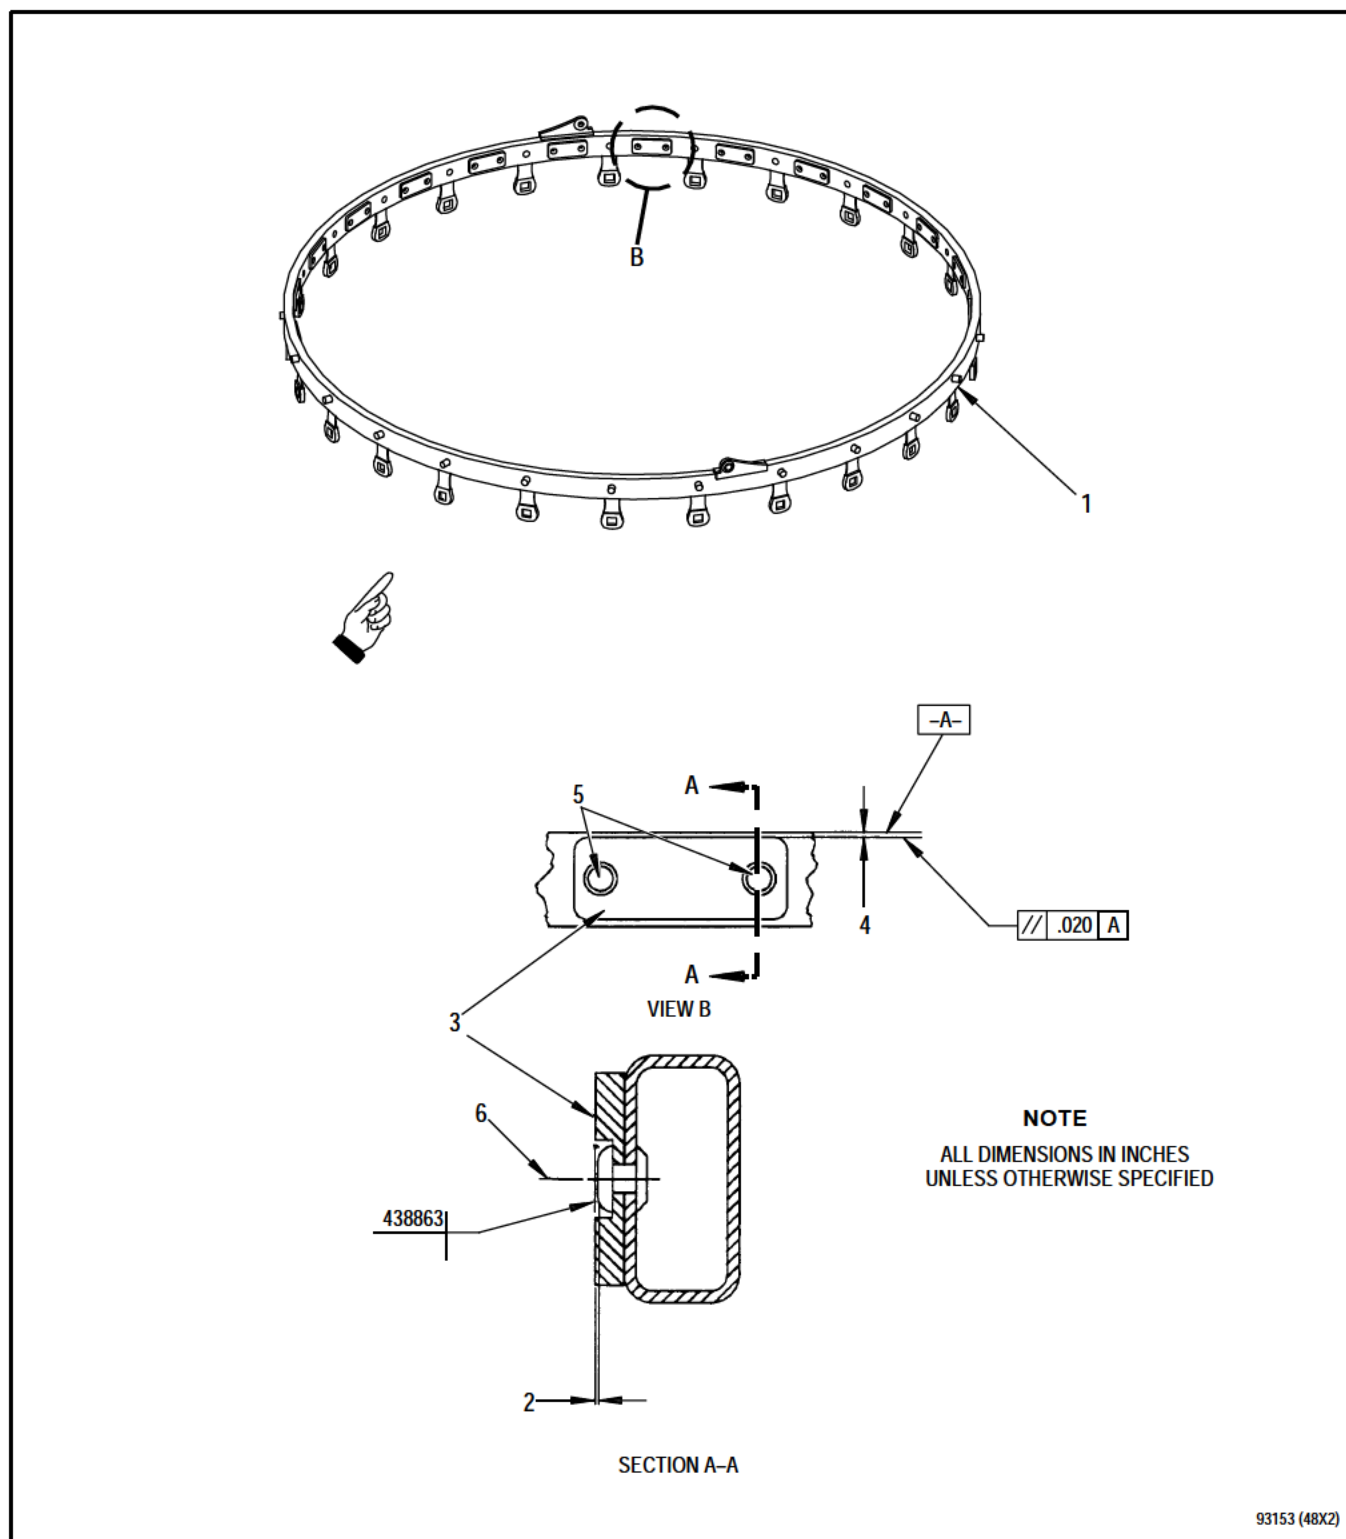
Inlet Synchronizing Ring - Bumper Replacement
